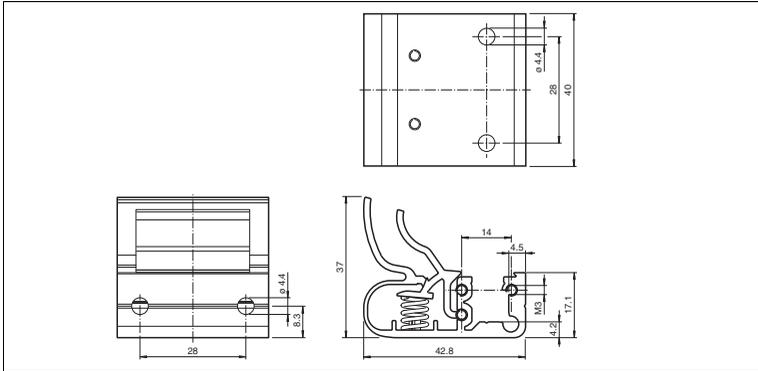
Dimensional drawing of the mounting aid OMH-SLCT-01
